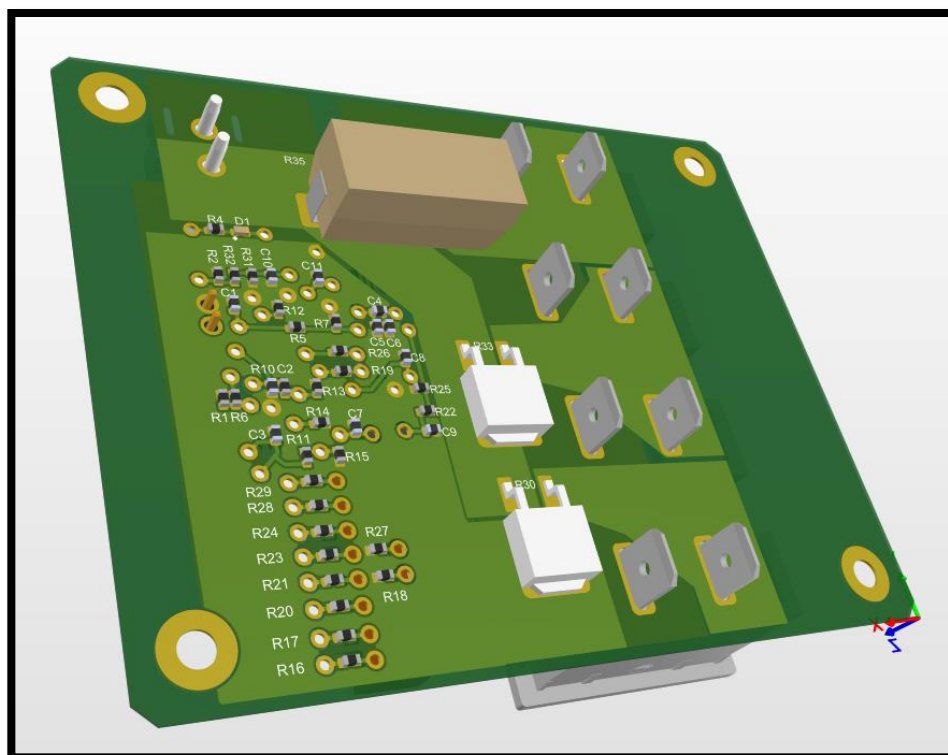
The 3D View of the Bottom Layer of the Finalized PCB
